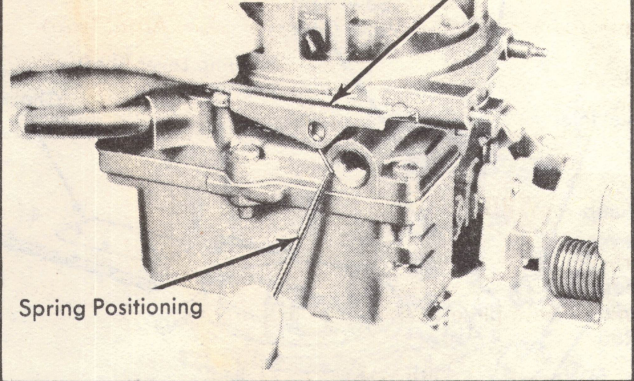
Installing Bowl Vent Valve Lever & Spring Correctly
